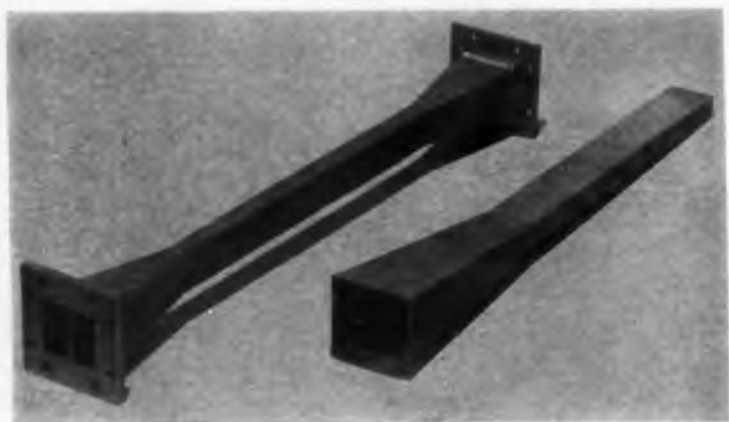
Here, a double type horn and a single type horn, with and without flange couplings, have been joined to straight waveguide sections by electroforming. Double horn involves grown-in parts.
